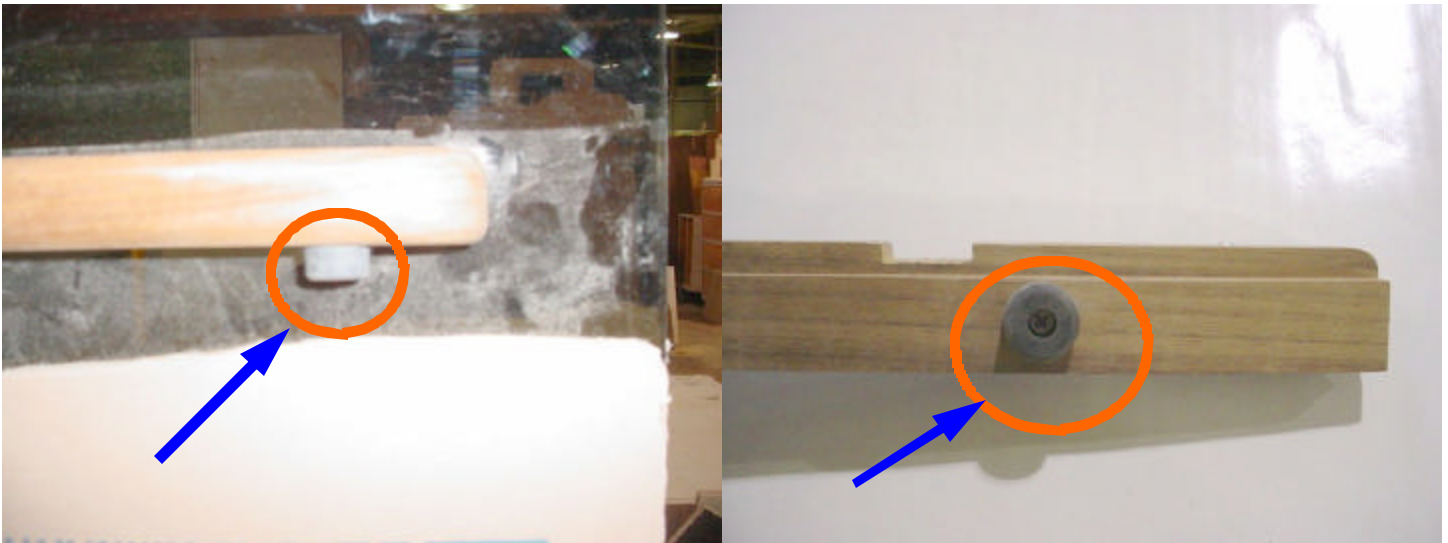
Use $\varnothing 3/32$ drill bit to drill a pilot hole x $1/4''$ deep on mark location. Secure $\varnothing 1/2''$ x $3/4''$ height rubber bumper to mounting holes use #6 x $5/8''$ flat head wood screws. Do same procedure to install rubber bumper on teak sliding track and back stop.
